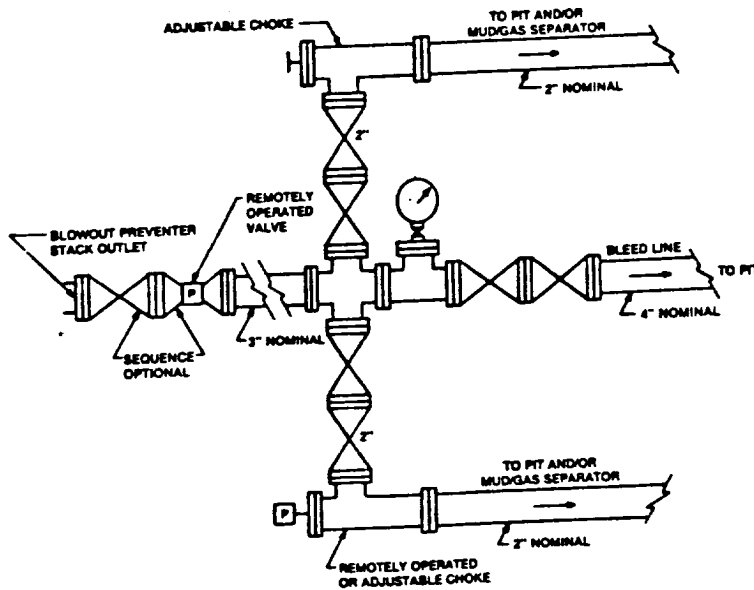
Typical choke manifold assembly for 5M rated working pressure service - surface installation.
